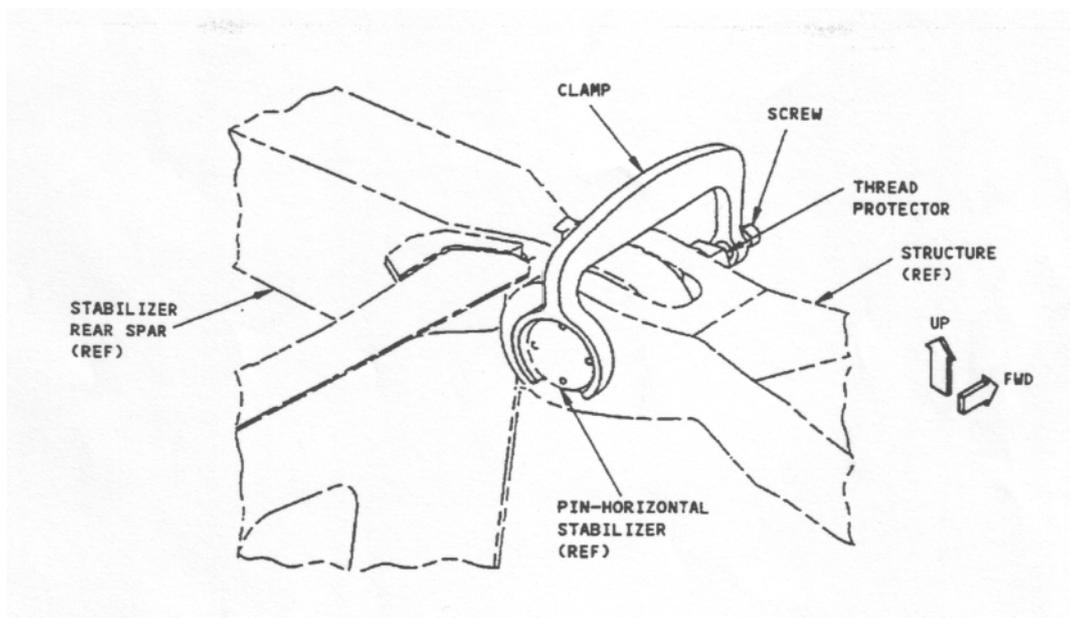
Horizontal Stabilizer Pin Removal Equipment
